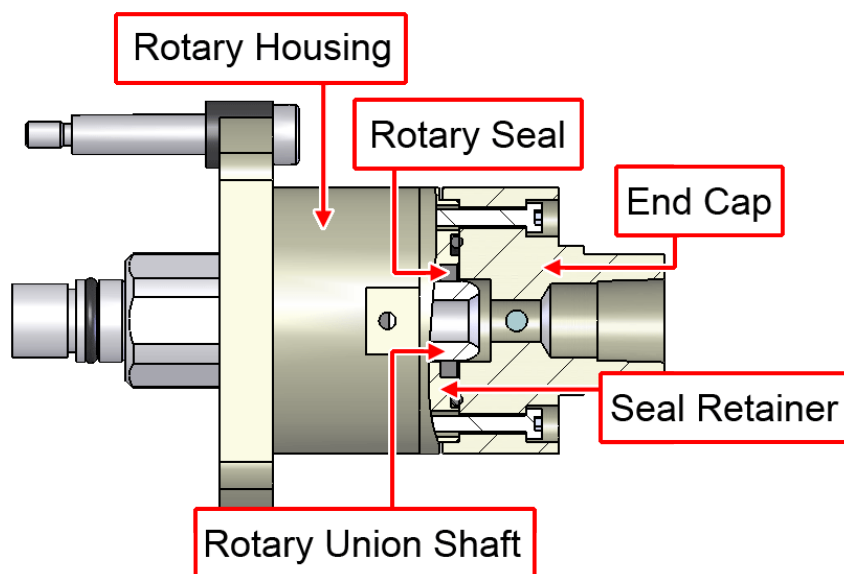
Cross-Section View of Wet Cut Rotary Union Assembly
